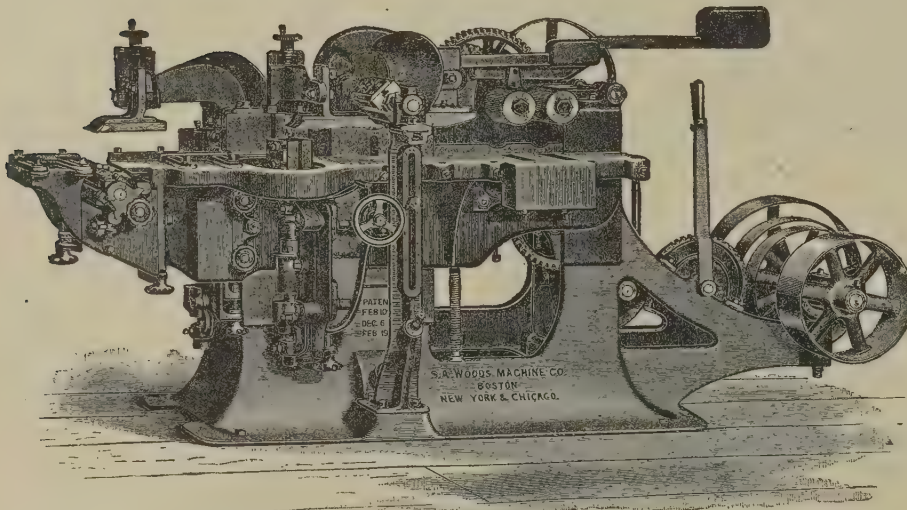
SEVEN INCH MOULDING MACHINE.
